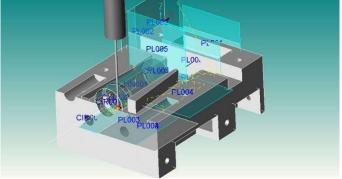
Geometrical characteristics inspected on the CMM
